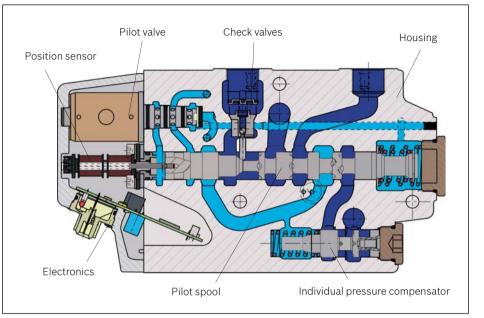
Sectional view of a Rexroth SB23-EHS1 valve slice
